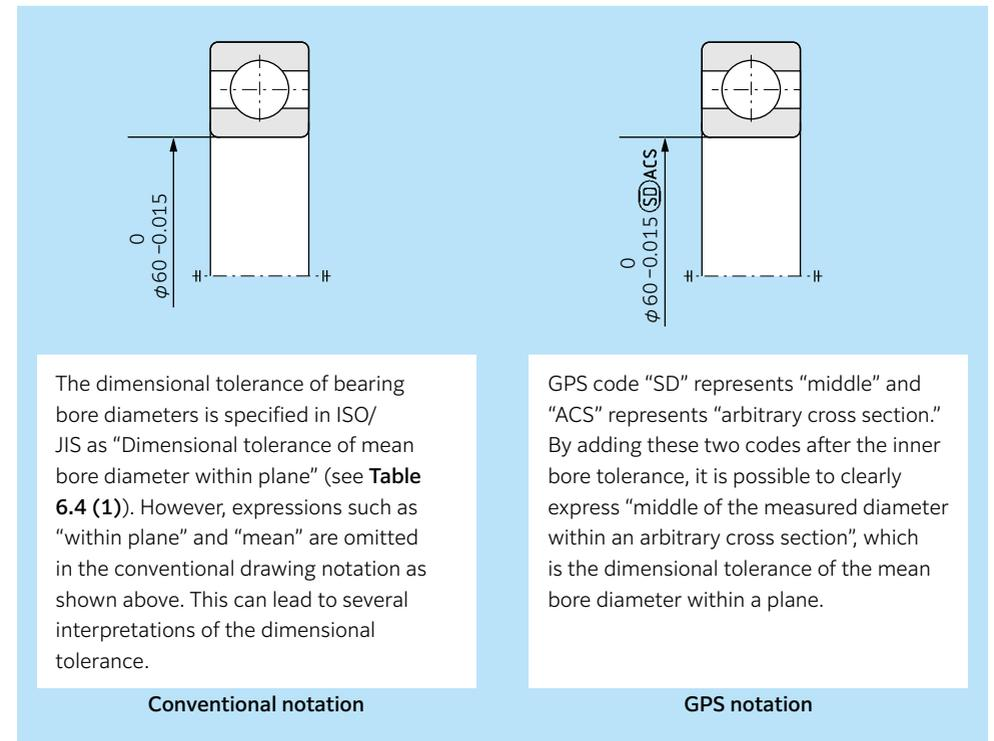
Notation example of bearing bore diameter tolerance
